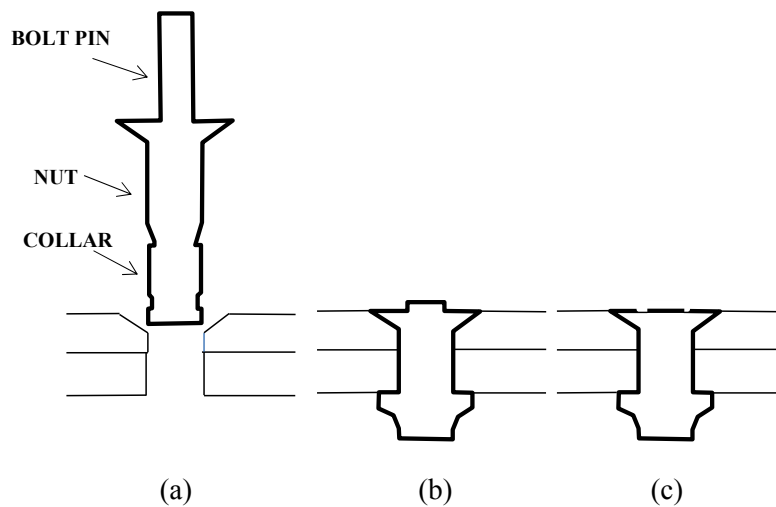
Three-part Jo bolt description (a); Jo bolt installed before the final pin milling operation (b) and Jo bolt final installation after pin milling operation (c)
